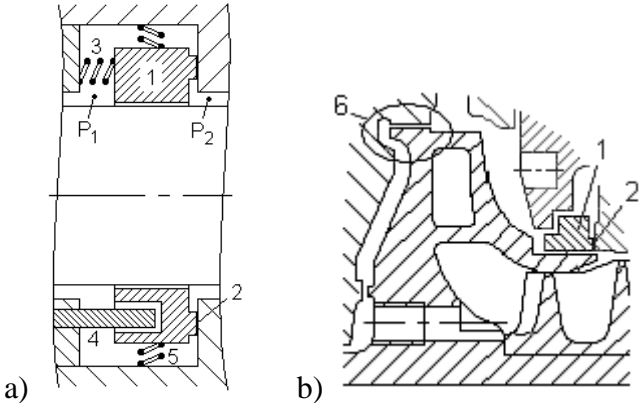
Floating sealing ring 1 of shaft (a) and impeller (b)
